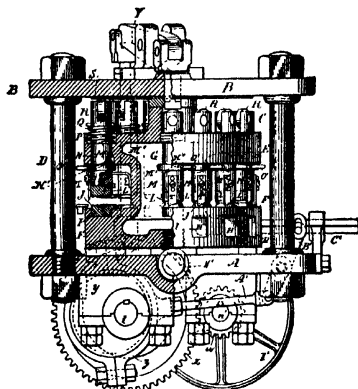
The Miller Machine for Molding Pyroxylin Plastic Articles.
